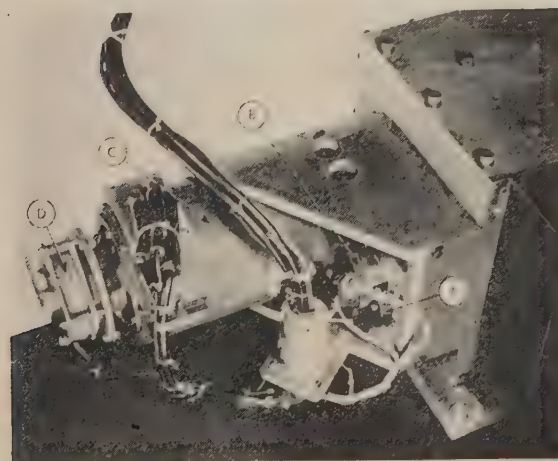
DRIVE-MOTOR END OF 45-DEG RACK-TYPE OSCILLATOR
